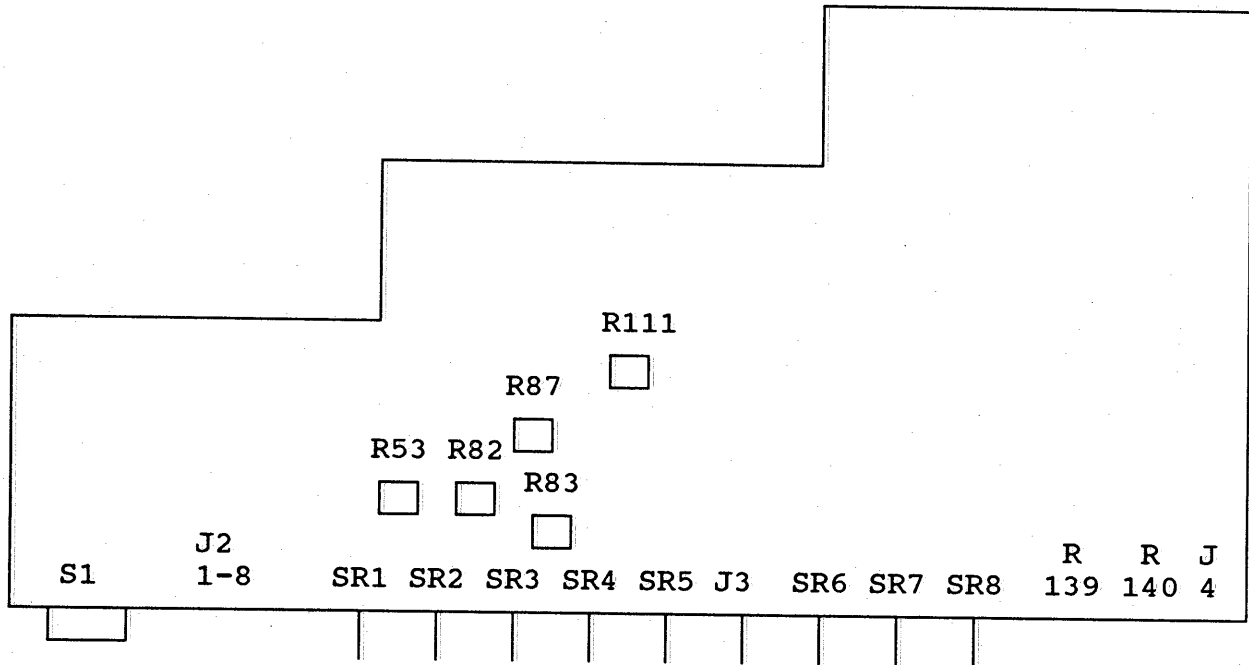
Internal Adjustment Locations (top view of bottom PCB)
